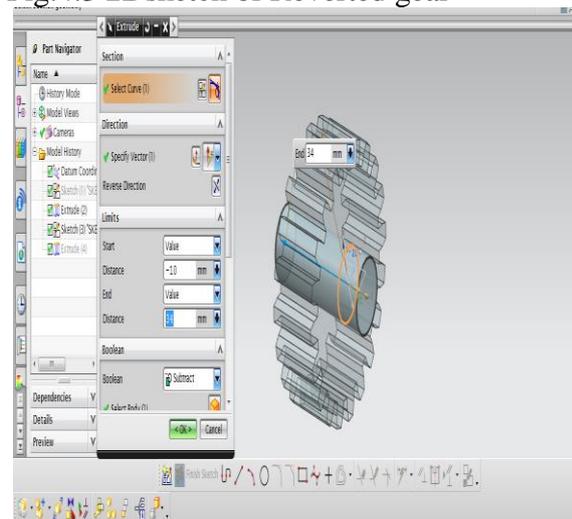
Extrude of above 2Dsketch of Reverted gear
